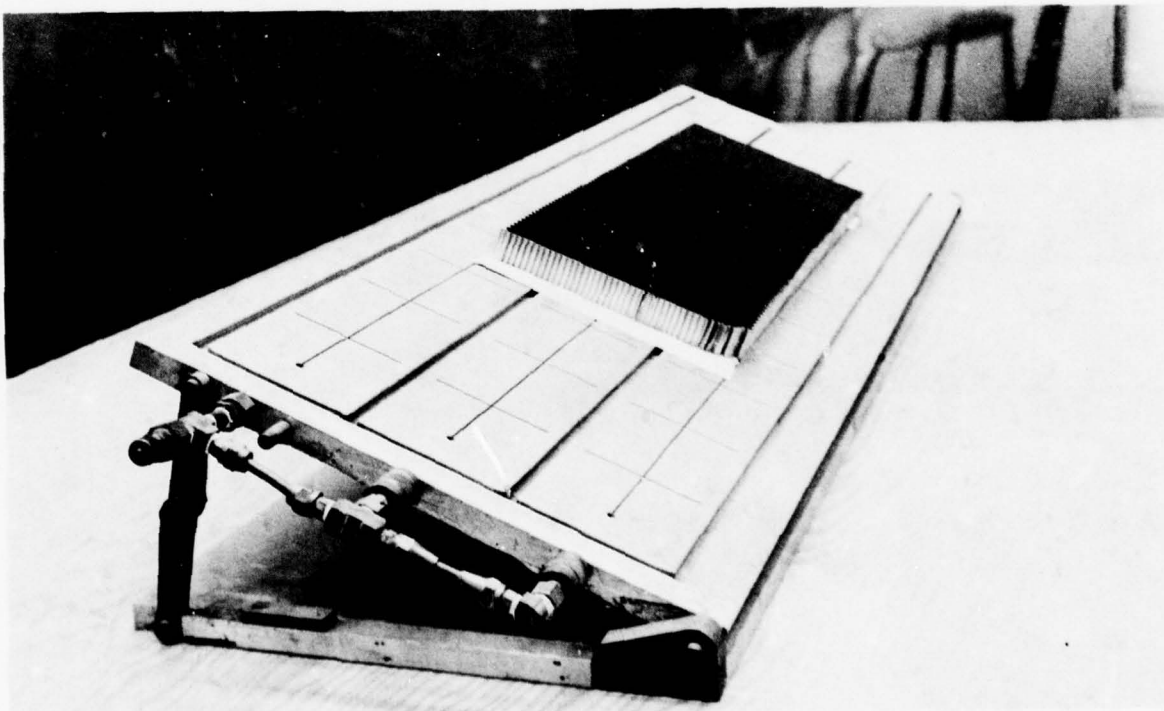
Adjustable Angle Base Plate (Sine Plate) With Vacuum Hose Attachments for Securing Core
